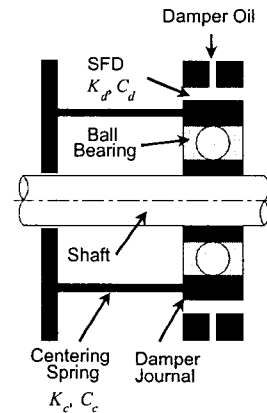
Typical squeeze film damper arrangement with a centering spring
